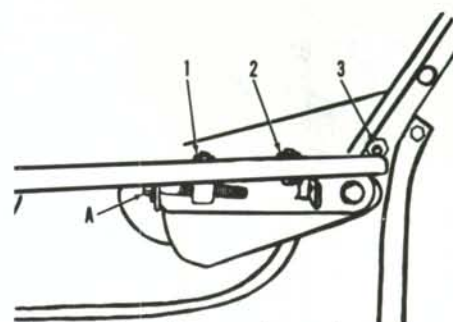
To adjust track tension, loosen clamp bolts (1, 2 & 3) and turn adjusting screw (3) until tension is correct. Some early models have only two clamp screws.
